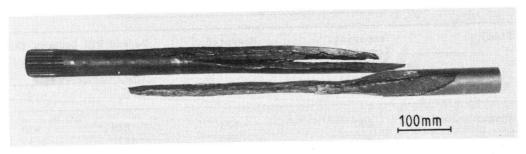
Service failure of induction hardened shaft by propagation of longitudinal shear cracks.
